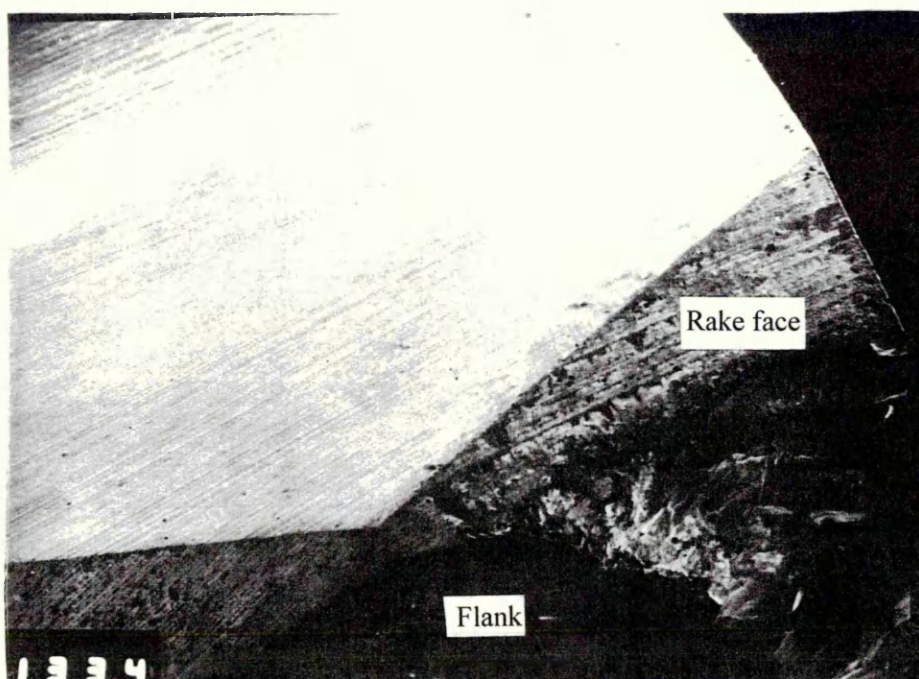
Edge chipping on the finishing tooth when sawing C25 nimonic alloy with segment type A2
